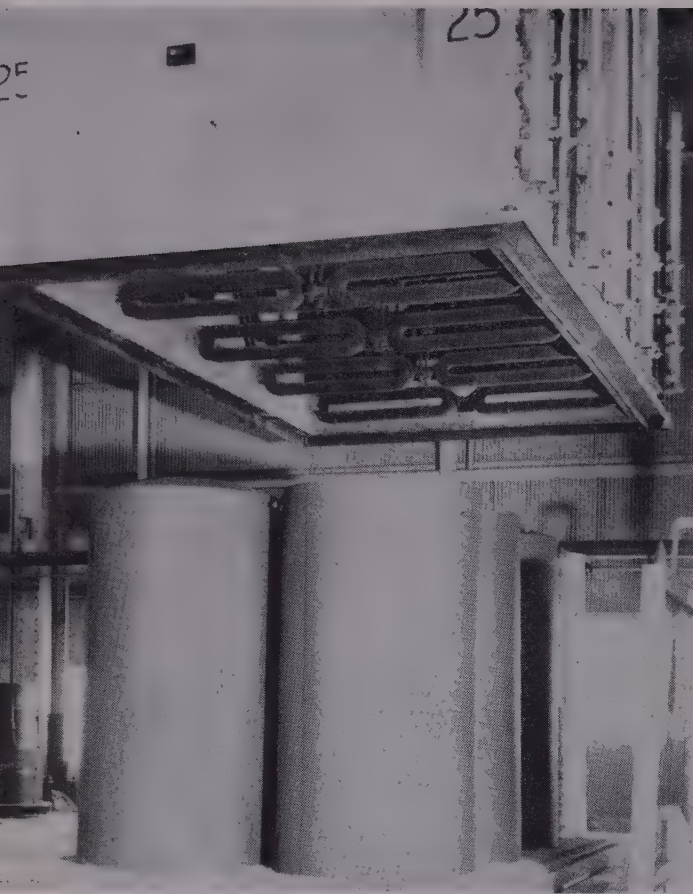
View showing cylindrical covers and horizontal radiant tubes for coil type furnace. Swindell Dressler photo
